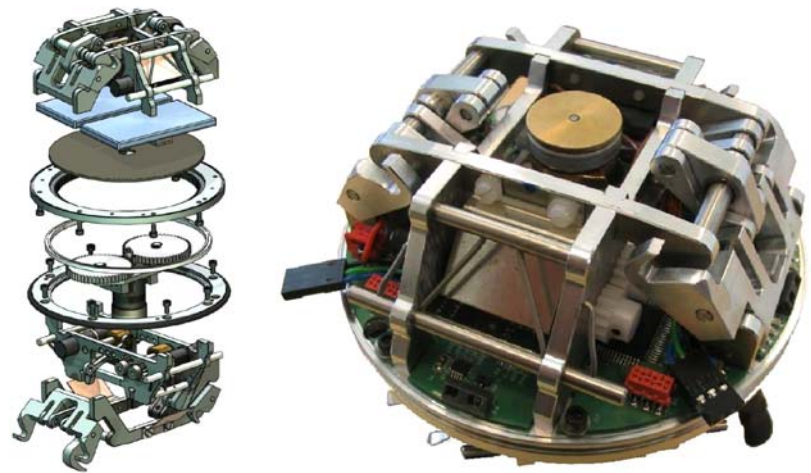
The ATRON module mechanics. Left: Exploded view of the CAD model. Right: Photo of the final design, including electronics, excluding the plastic cover
